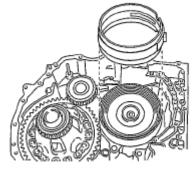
Identifying Brake Band Anchor Bolt Courtesy of MAZDA MOTORS CORP.
